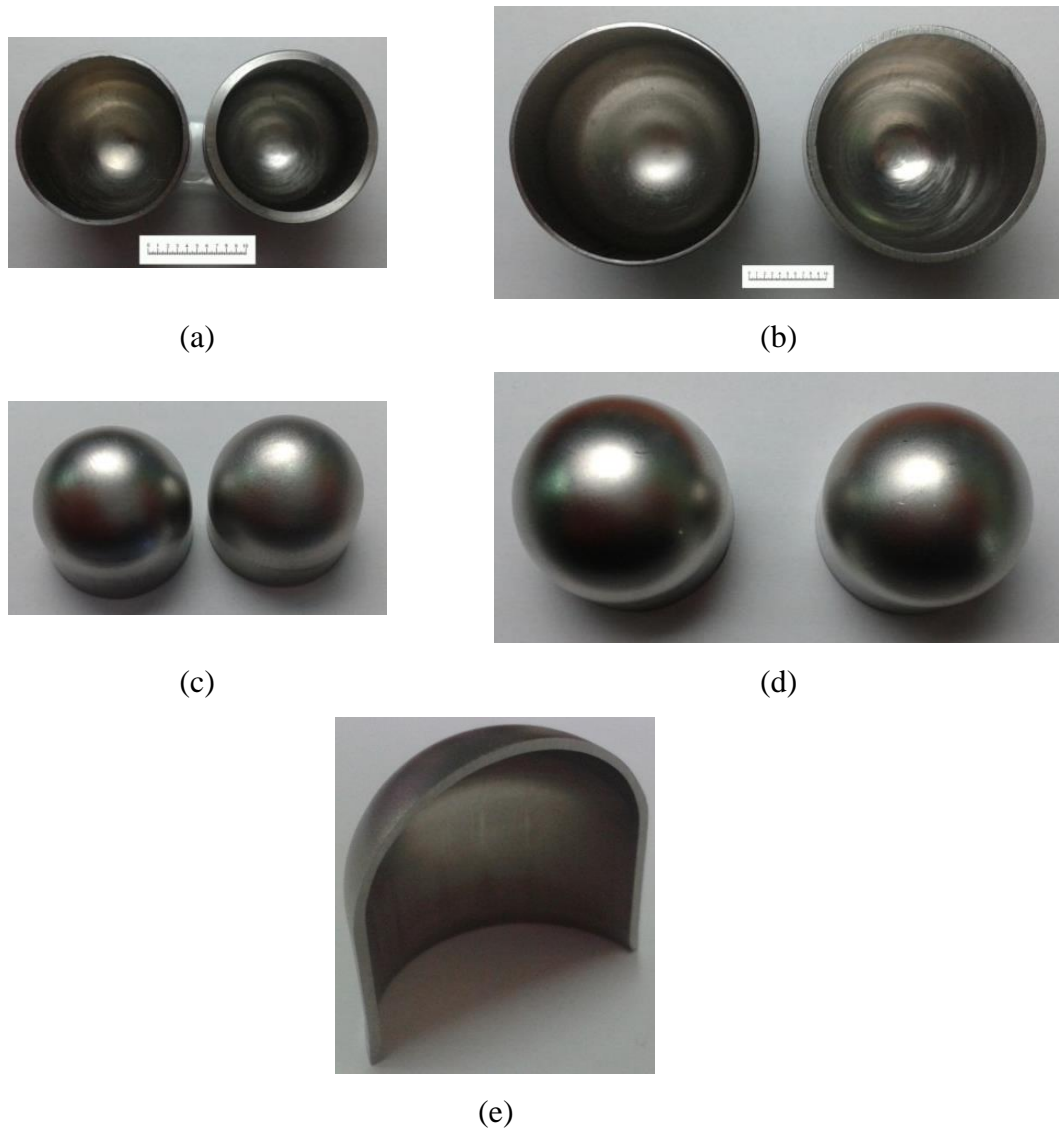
Combined geometry shells; (a) bottom view of R75T05 and R75T1, (b) bottom view of R125T05 and R125T1, (c) top view of R75T05 and R75T1, (d) top view of R125T05 and R125T1, (e) cross-section view of R125T1.
